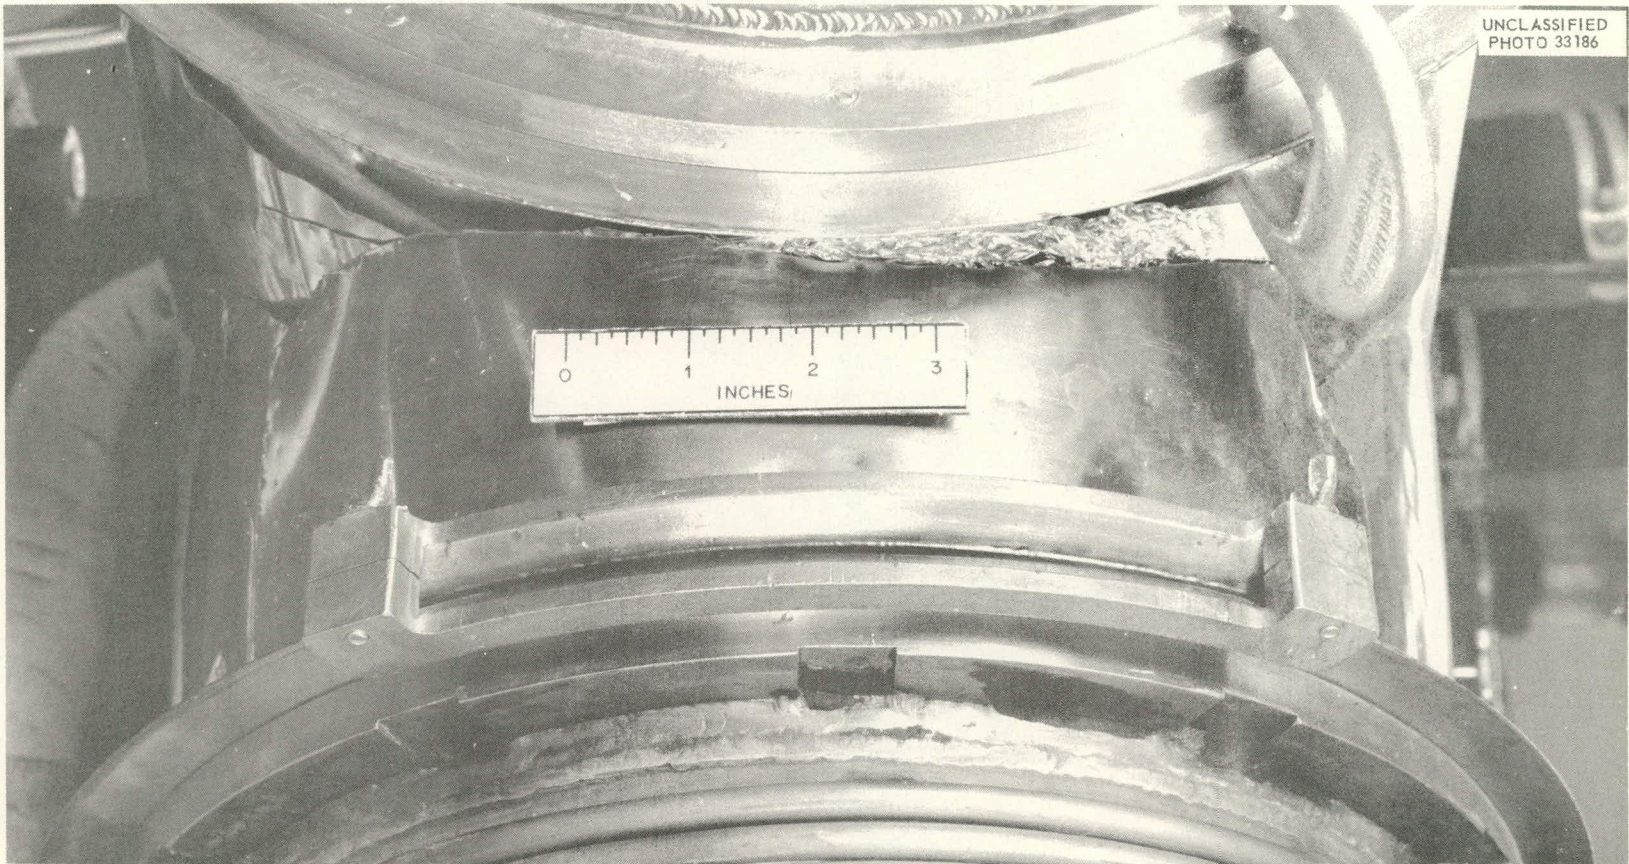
Outside Seal Welding on PIG Facility.
